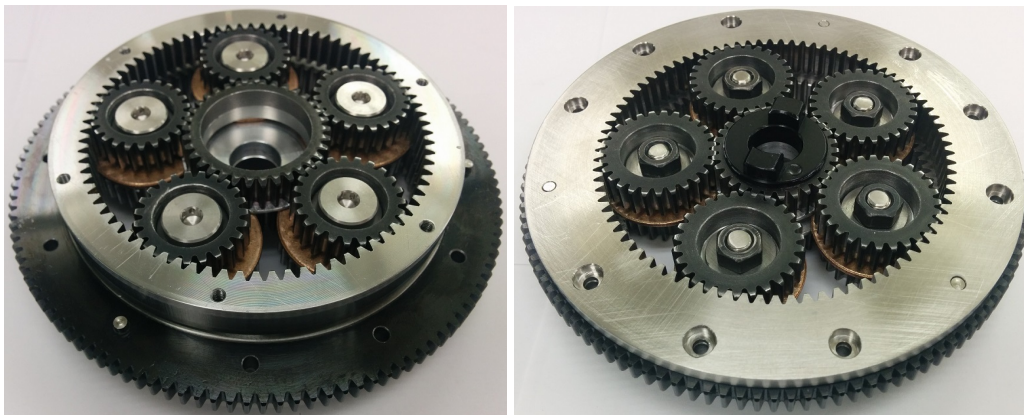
Prototype of a bearingless planetary gearbox with assembled planets. It is used in the actuator prototype of Sec. 6.4
